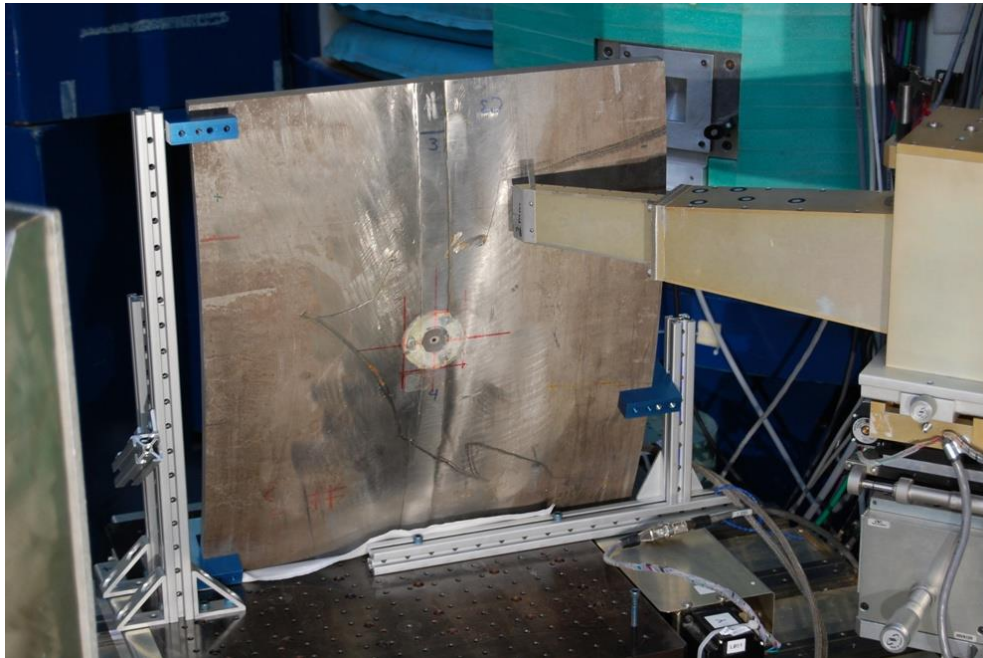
Prototypic canister weld installed in residual stress fixture at NRU (Chalk River). Note that hole in center is from previous stress measurements using hole drilling.
